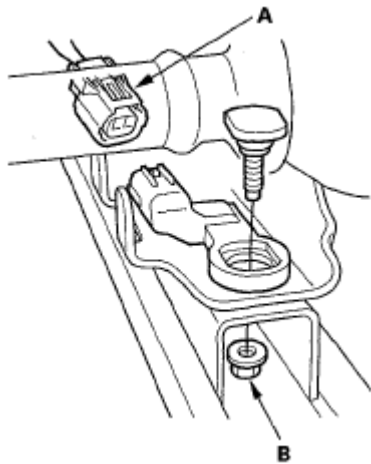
Identifying Left Side Driver's Seat Position Sensor, 2P Connector And Fasteners
